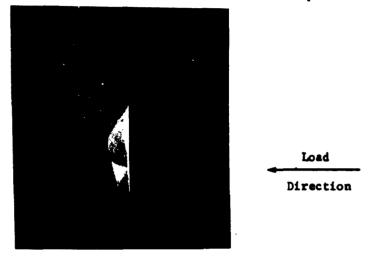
Reproduction (5X) of a radiograph of a resistance spot weld with a 0.003" nickel foil insert. This weld was also located in the same specimen (LA32N) discussed under Figure 1. Note that the X-ray image of this spot weld (No. 8) is similar to the images of the spot welds shown in Figures 1 and 3. The section lines indicate the plane of cross-sectioning. The light areas at the top left of the weld are folds of the nickel foil insert. The foil was folded on top of the specimen and not between the 301 sheets. The edge of the doubler sheet is seen at the left side of the reproduction.
